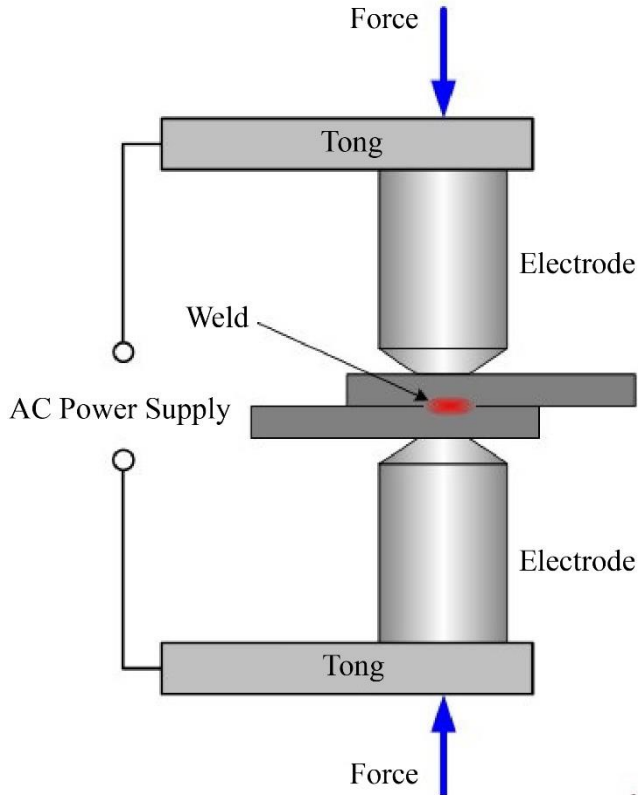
Resistance Spot Welding (RSW) working
